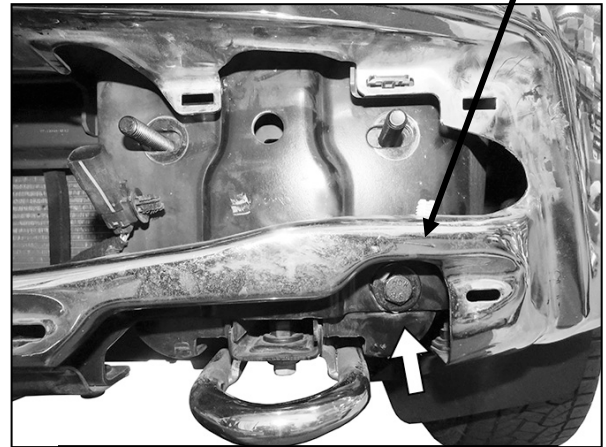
Insert Double Bolt Plate through top holes in frame. Thread (2) Plastic Retainers onto Bolt Plate to hold in place
